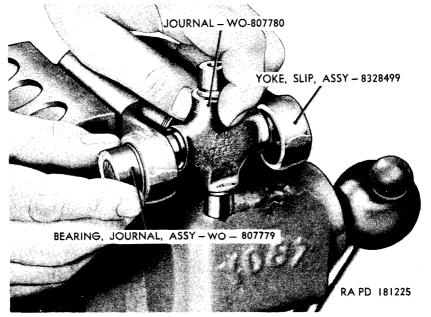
Placing universal joint journal in position in slip yoke assembly.
